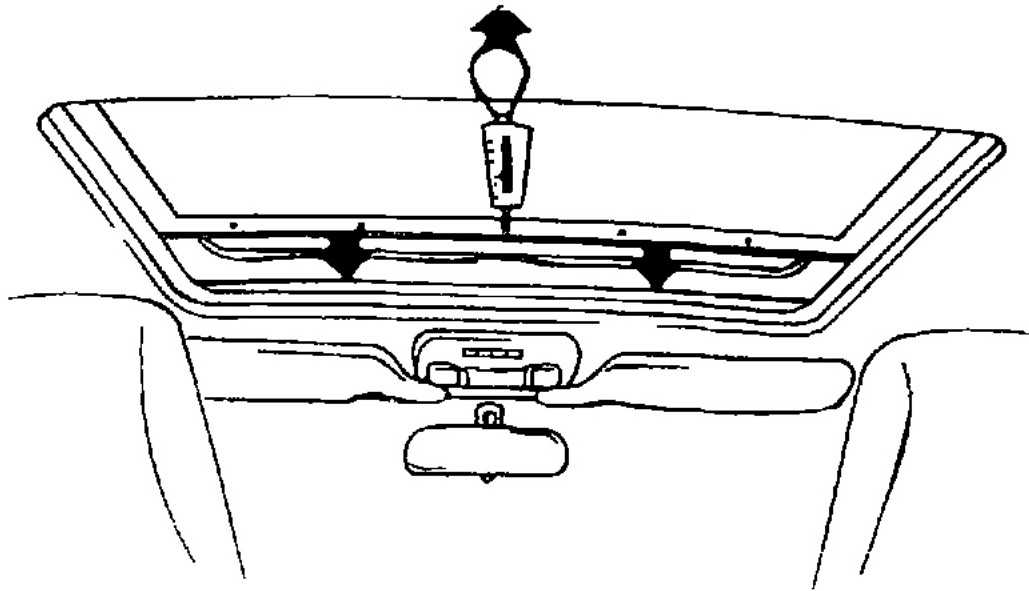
Aligning Guide Roller & Slider Mark
